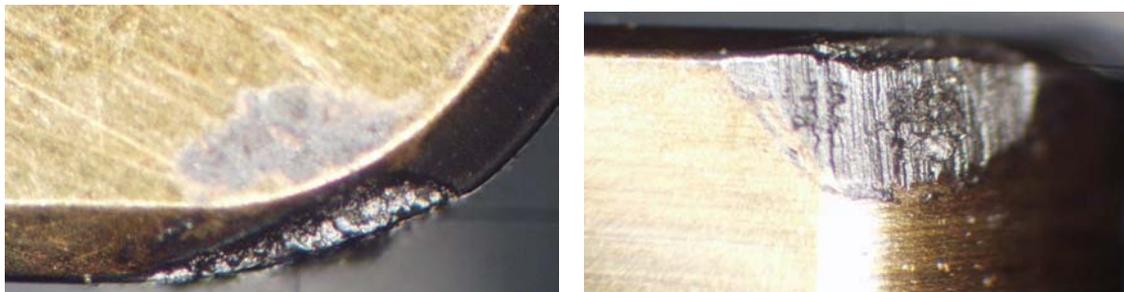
Topography of as-machined surfaces of low-density, soft material (LdS), and an example of typical profile of cutting edge after producing these surfaces; finishing at 500 ft/min. (2.54 m/s) cutting speed, 0.0035 inch/rev. (0.089 mm/rev.) feedrate, and 0.008 inch (0.203 mm) depth of cut.
